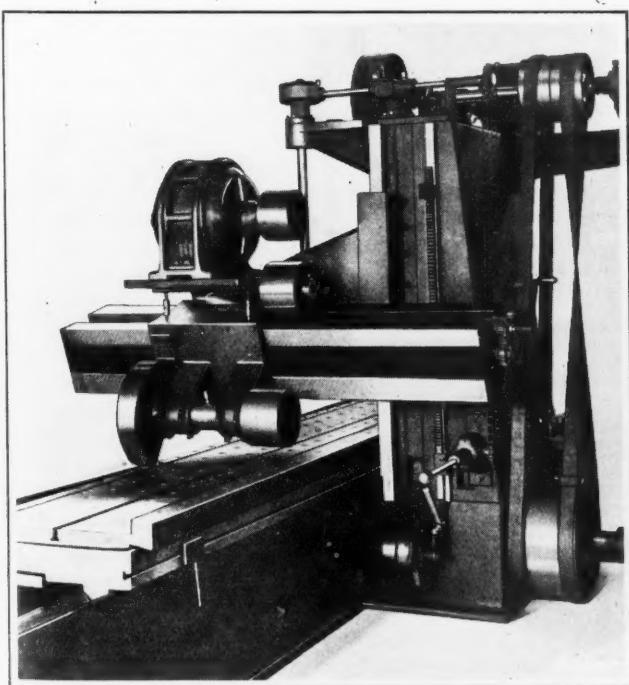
Open-side Planer equipped with a Special Grinding Head on the Cross-rail for grinding Railway Crossings after planing
